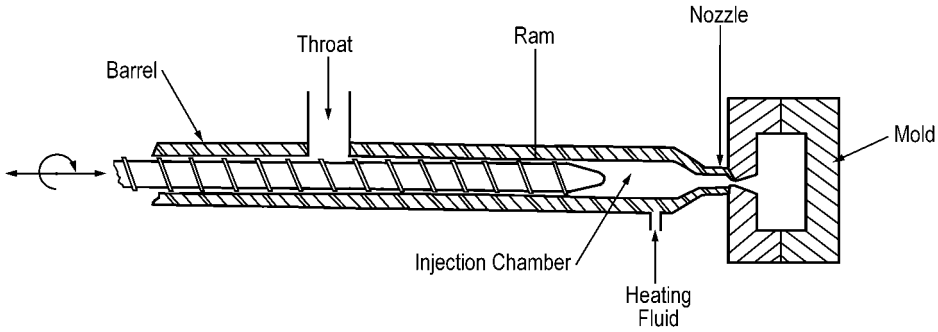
Inline reciprocating screw machine for injection molding (courtesy of J. Sommer and Rubber Division ACS [4])
